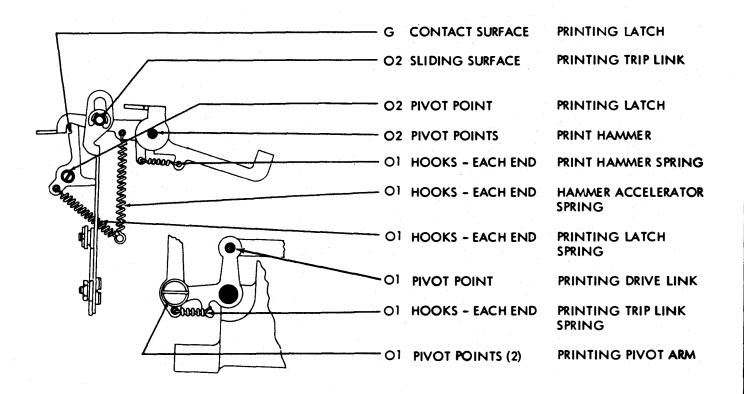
Printing Mechanism with Steel Print Hammer, Left Side View
